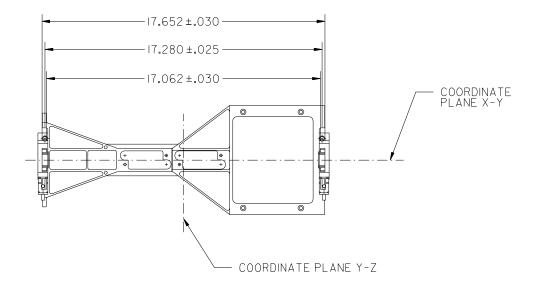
HRF Slide Guide Assembly Envelope
